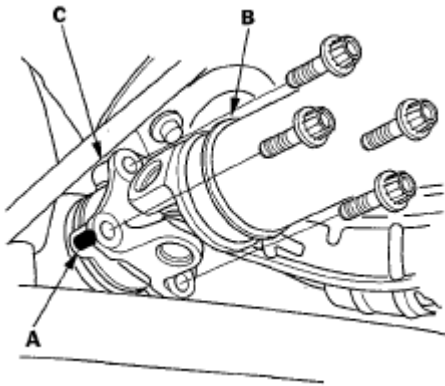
Identifying Reference Marks Of No.1 Propeller Shaft And Companion Flange
